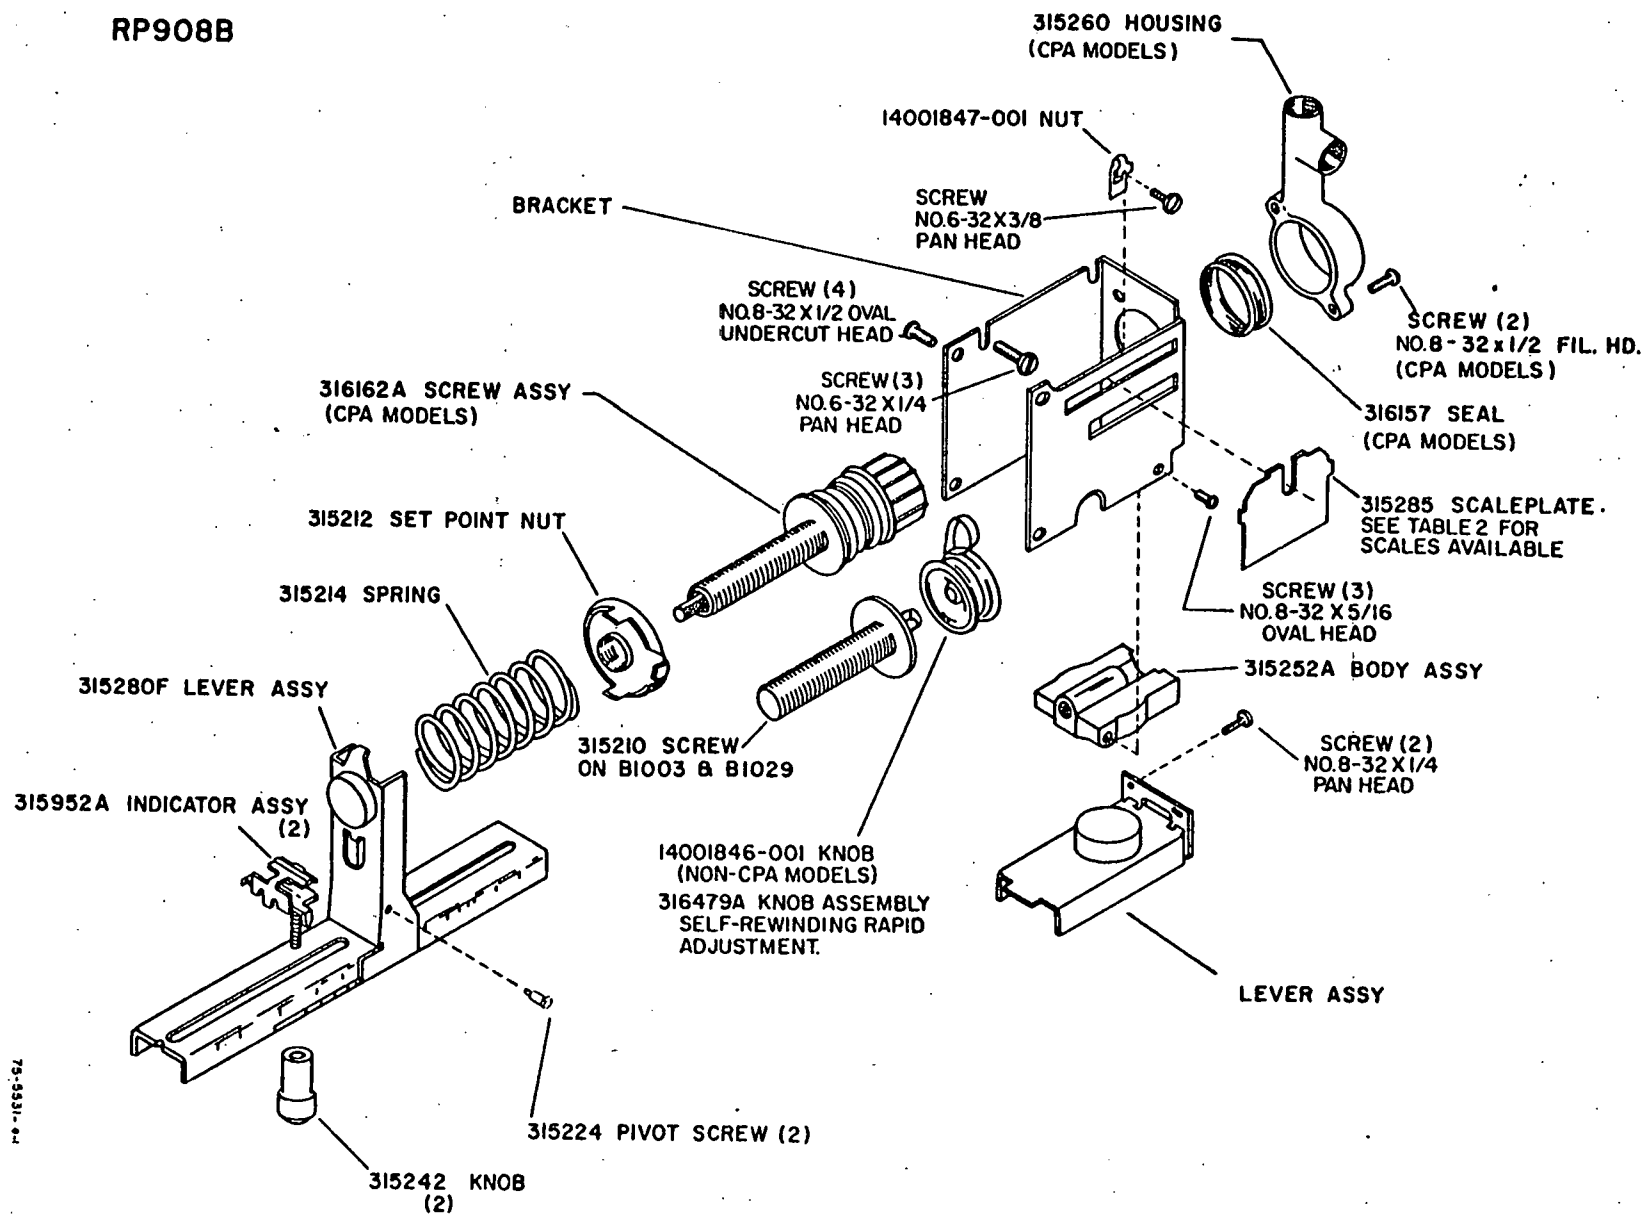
Detail of RP908B Bracket and Indicator Assembly.
